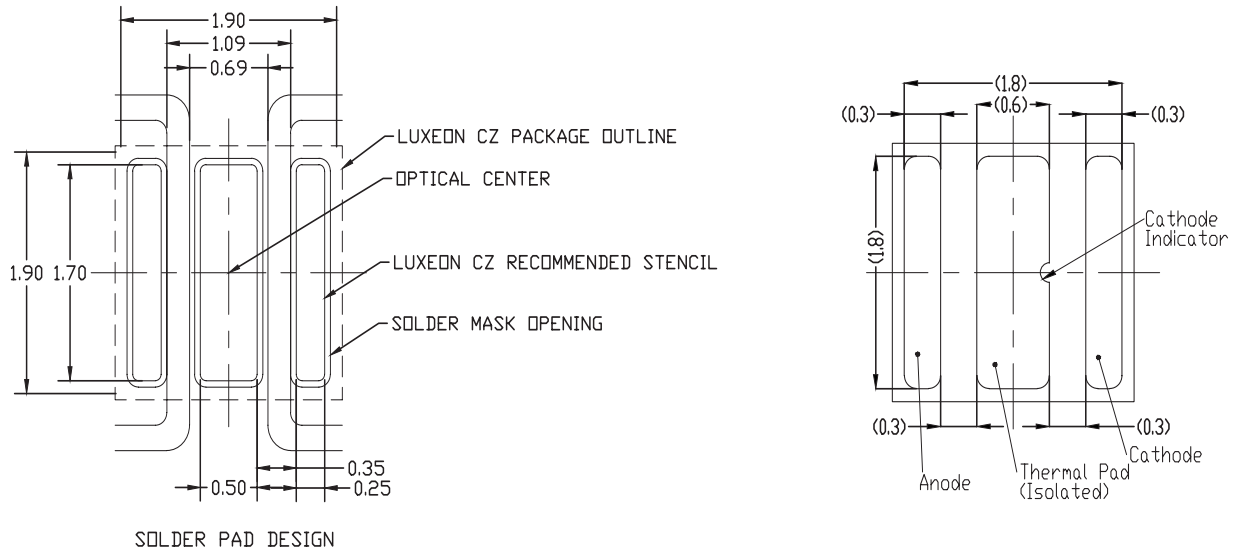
Recommended PCB solder pad layout for LUXEON CZ Color Line.
